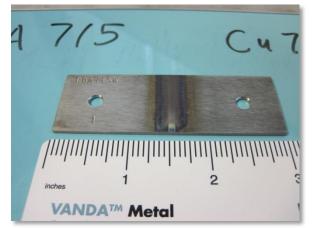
70-30 Cu-Ni 1-inch by 3-inch coupon with weld
